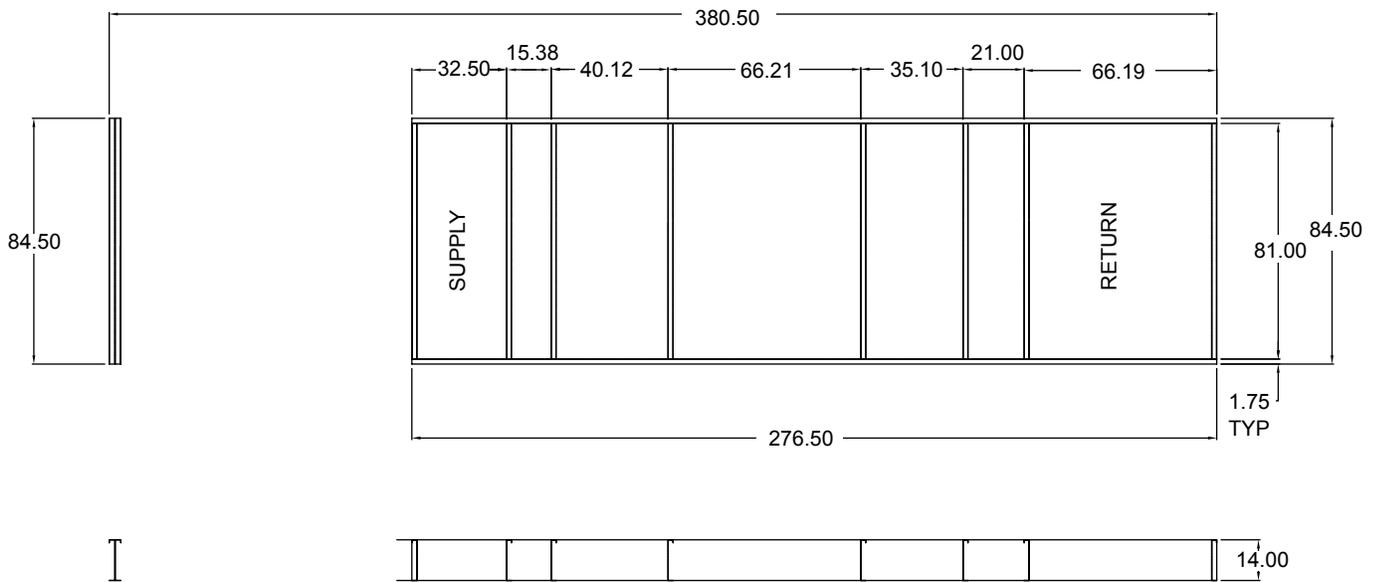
GENERAL ARRANGEMENT DRAWING (EXTENDED CABINET)
